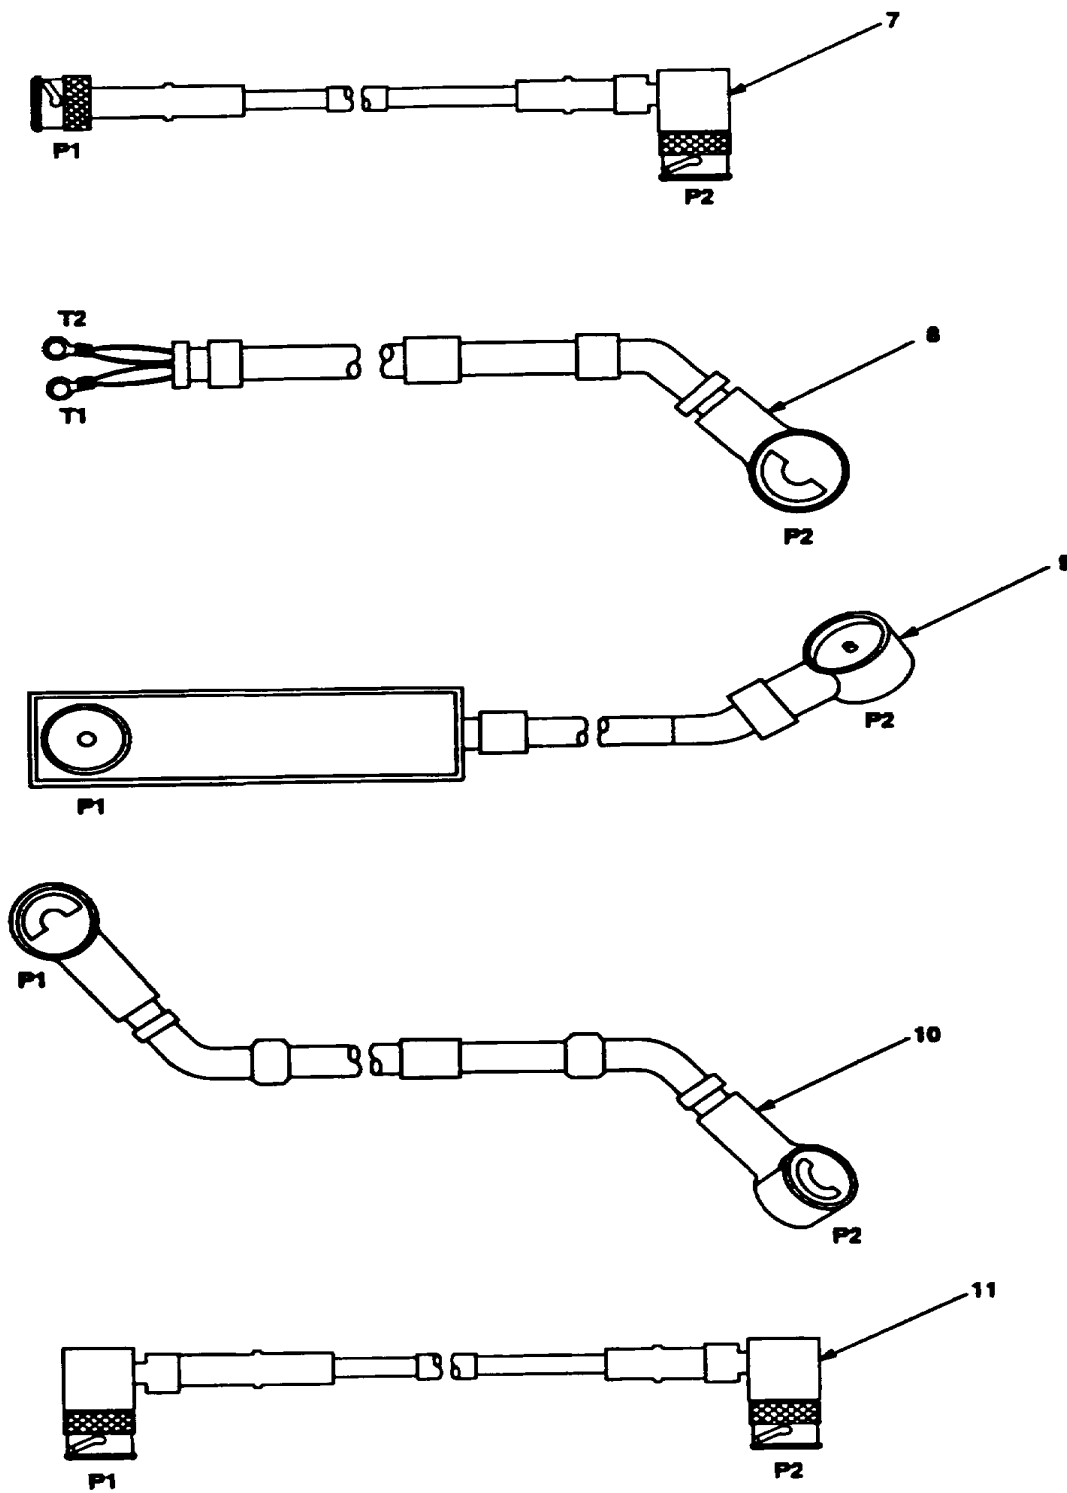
(2). MK and Radio Installation: Radio Equipment Locations
